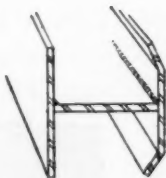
Bottom flange of "T" section can be bent formed from light material. Welded section distributes metal on one side only to web. Saves 10% metal and 50% fabricating cost over section shown in Figure 3.
